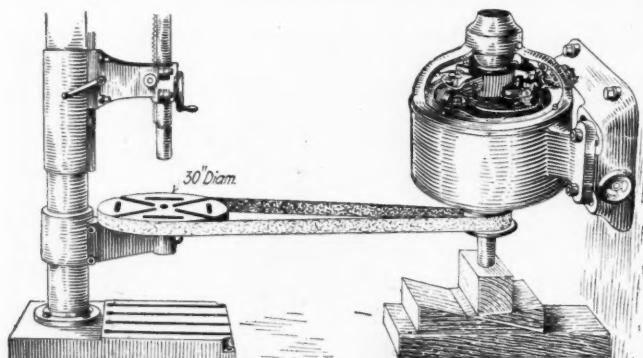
EMERGENCY ARRANGEMENT OF MOTOR AND DRILL PRESS
